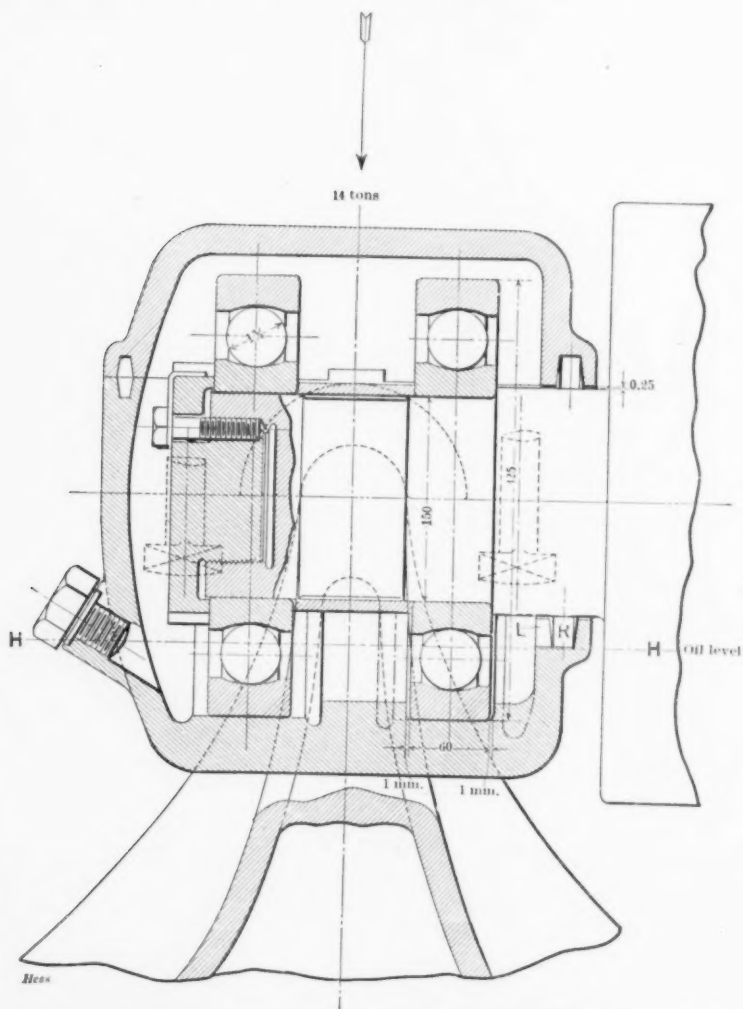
LONGITUDINAL SECTION OF PAPER CALENDER JOURNAL WITH LOAD DISTRIBUTING MOUNTING. THE INNER BALL BEARING TAKES END THRUST.
